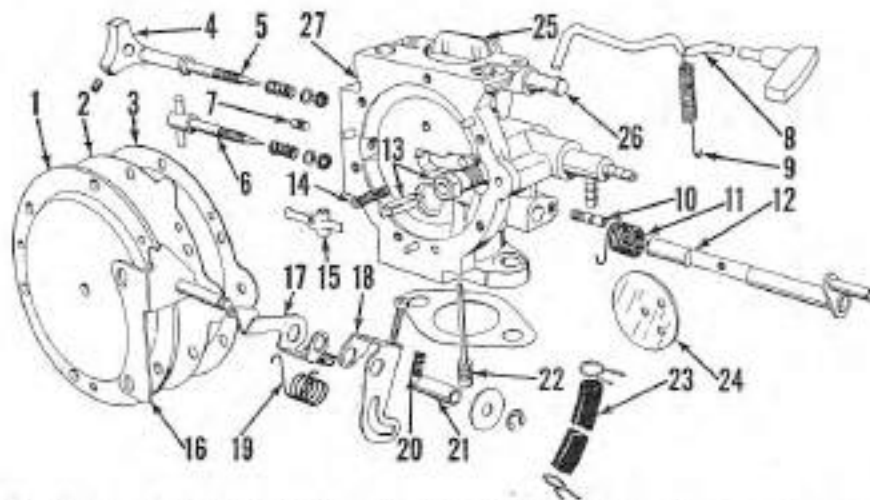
Exploded view of the Tiltson, diaphragm type carburetor used on some Fishing Scott models.
